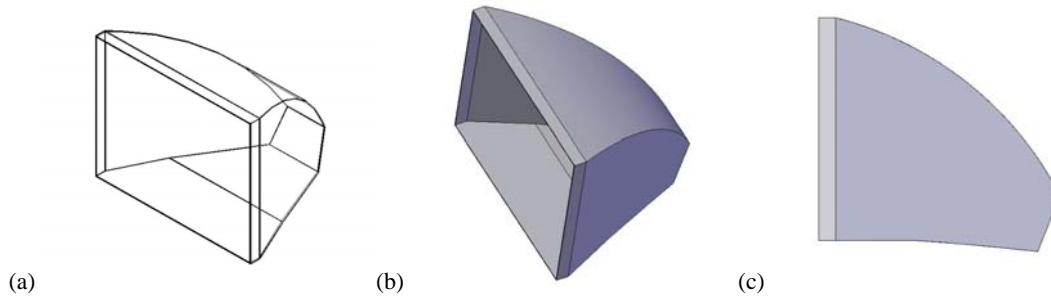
CAD drawings of the solar collector. Perspective views (a) and (b). Side view (c).
